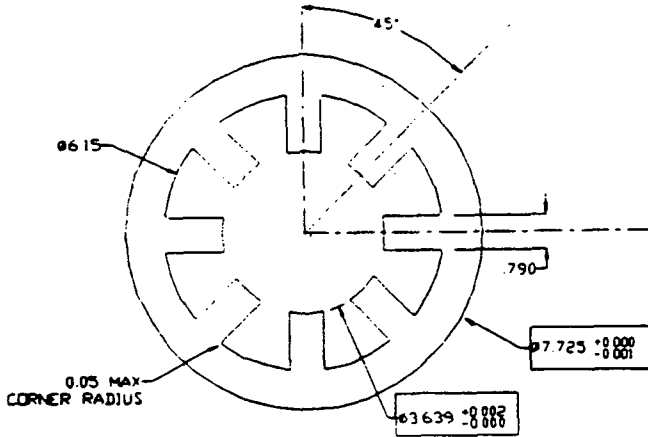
8 Pole Radial Bearing Stator S1 Geometry
